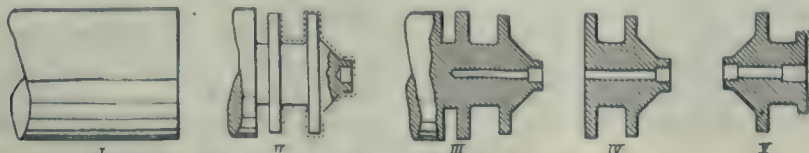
METHOD OF MACHINING PART "B," FIG. 8.
